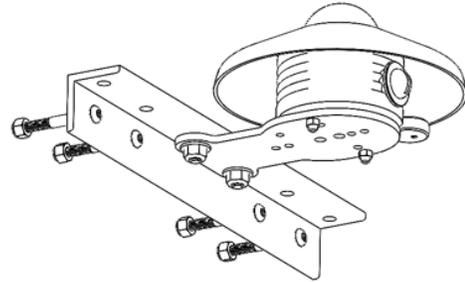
Bracket assembly 14983 permits mounting in the plane of a fixed PV array.
